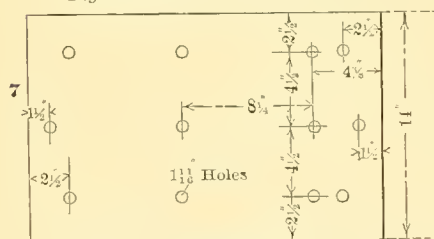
BRAKE-CYLINDER END-BLOCK.
